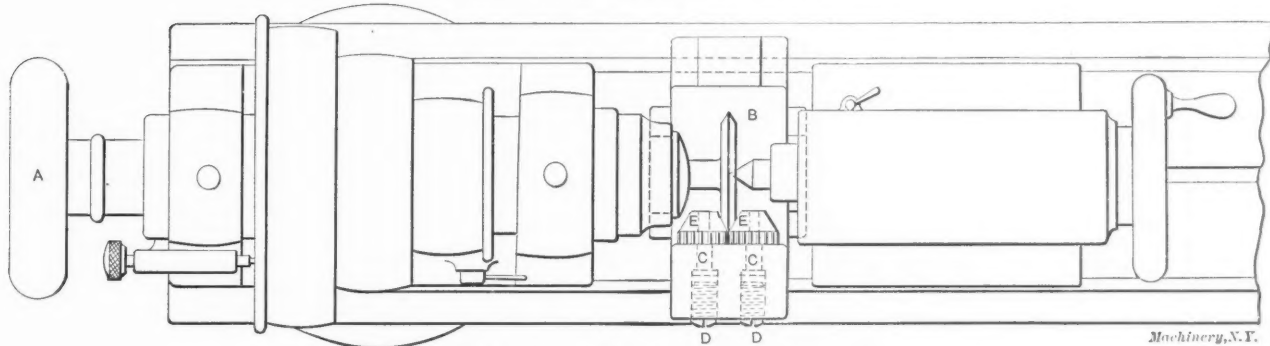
Bench Lathe with Fixture for Charging Diamond Lap.
